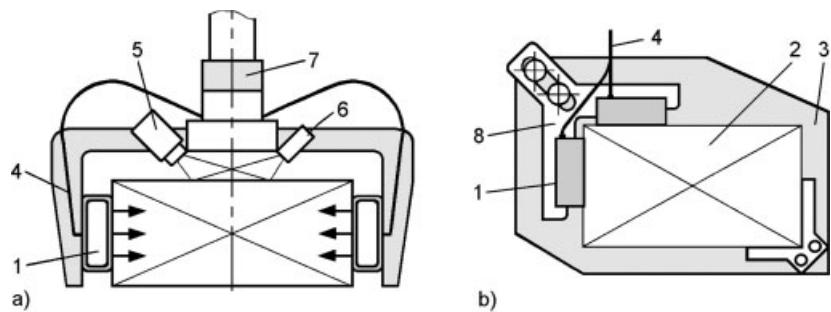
Impactive prehension with a compressed air bag (*Pronal*)
